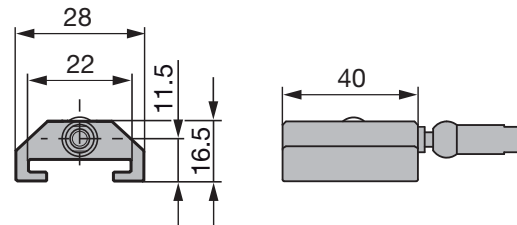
Installation dimensions of BTL5-T-2814-1S magnet
